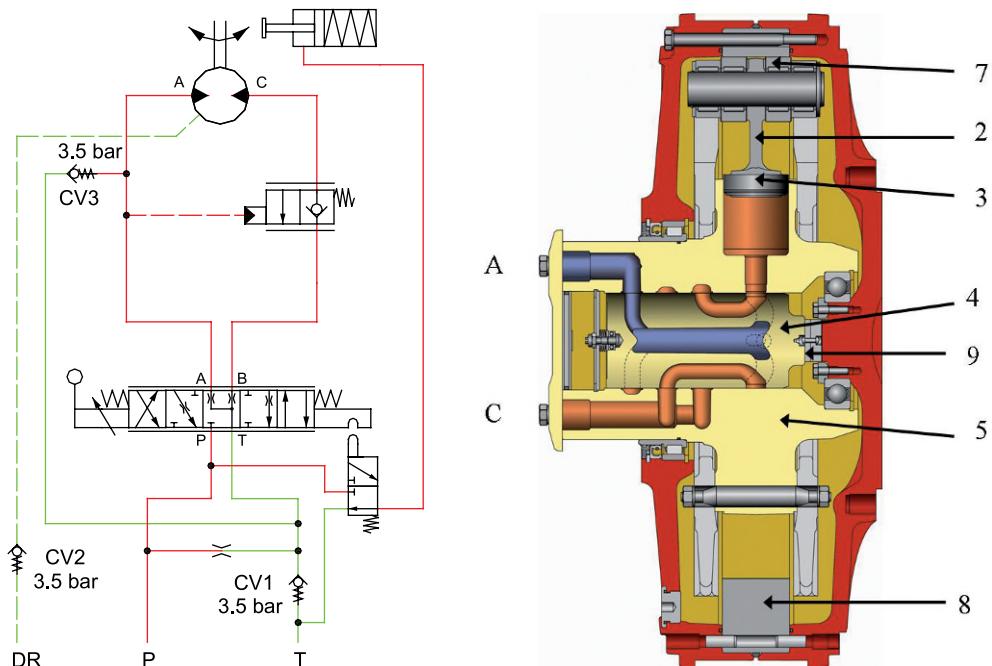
Hydraulic diagram and sectional drawing of the failing winch control
